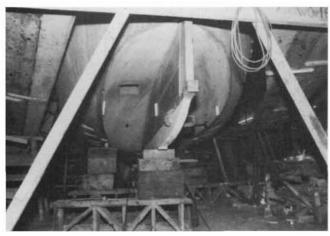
After end jacked up so that holes can be drilled through deadwood for keel bolts, the longest bolt being 3ft 6in.
